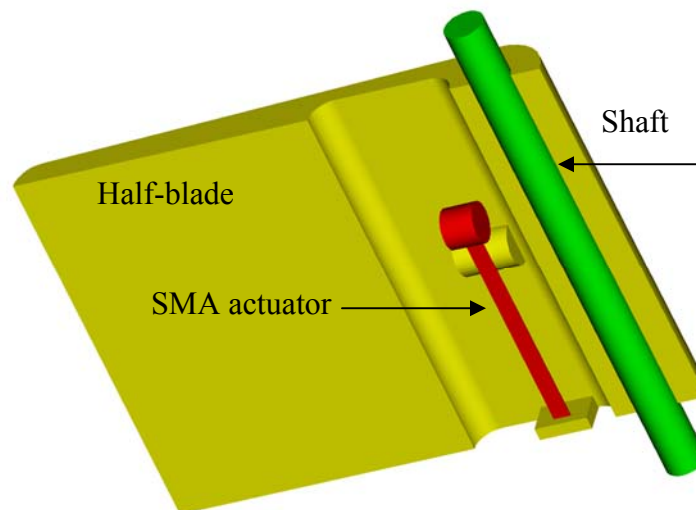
Design of Leading Edge Locking and Releasing Mechanism
